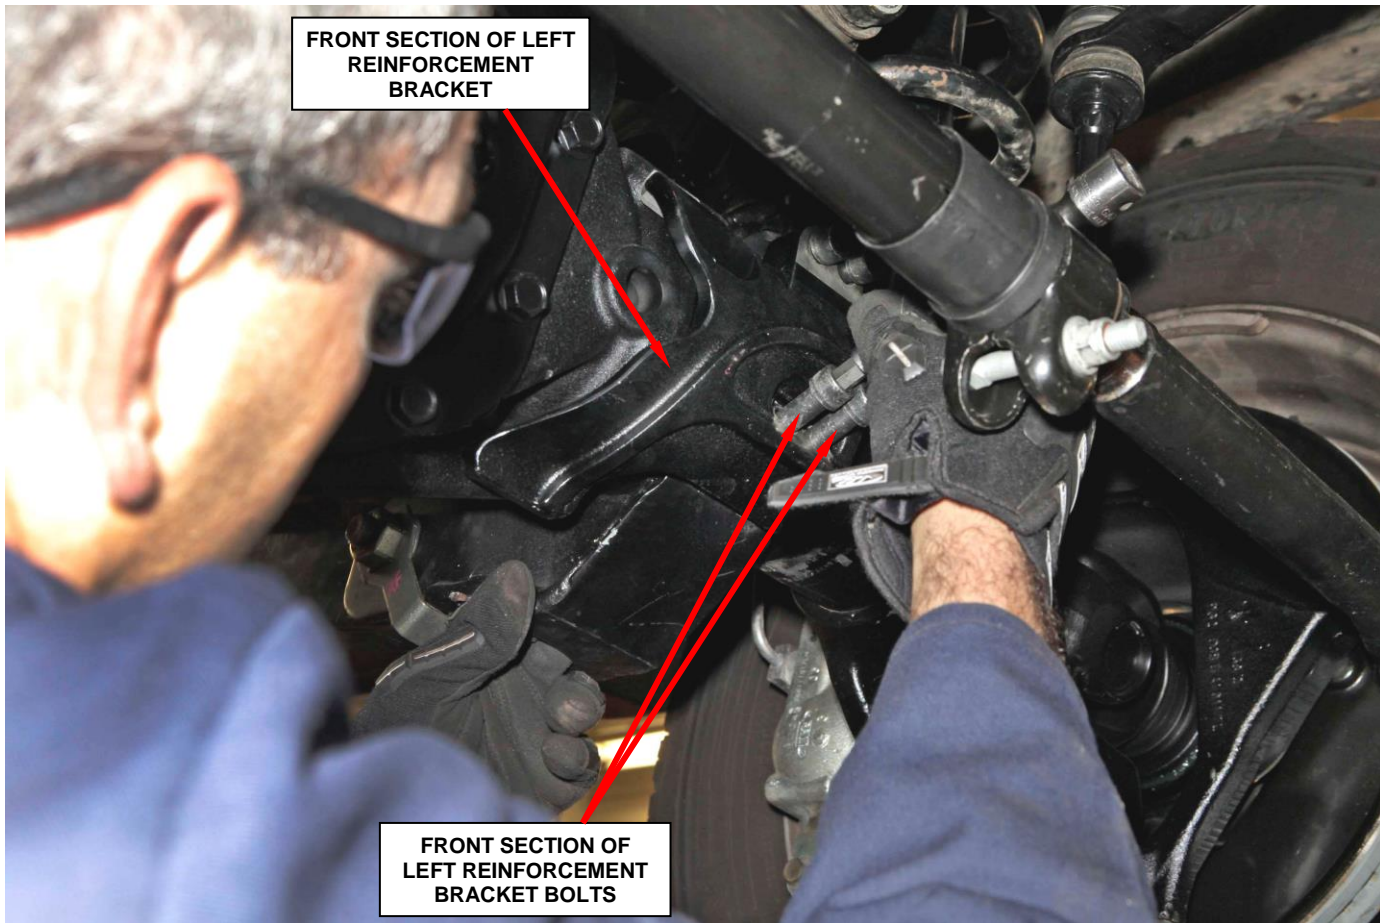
Install Front Reinforcement Bracket Lower Retaining Bolts (hand tight)
